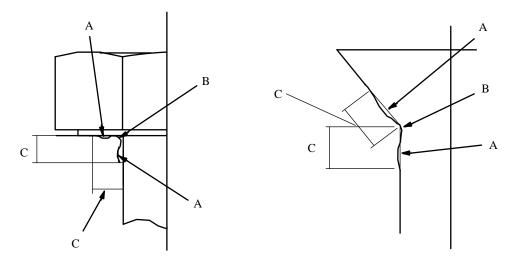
Tolerance of head-to-shank fillet profile
